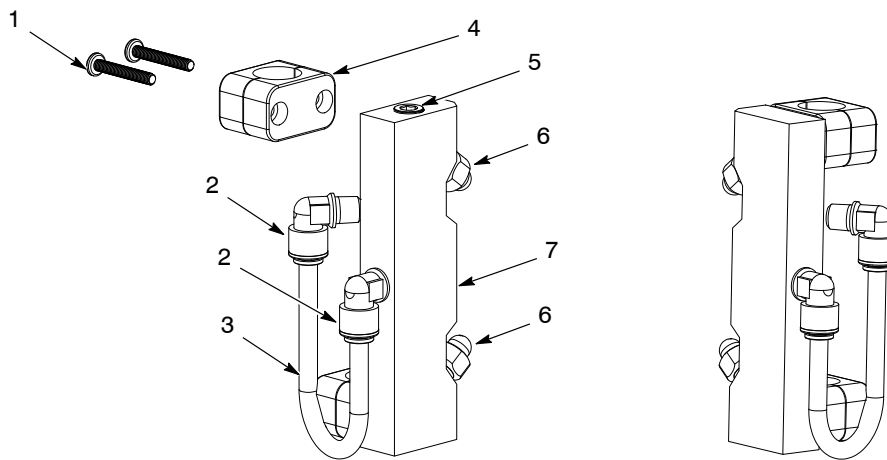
Gun Blow Off Manifold Assembly Kit Parts
